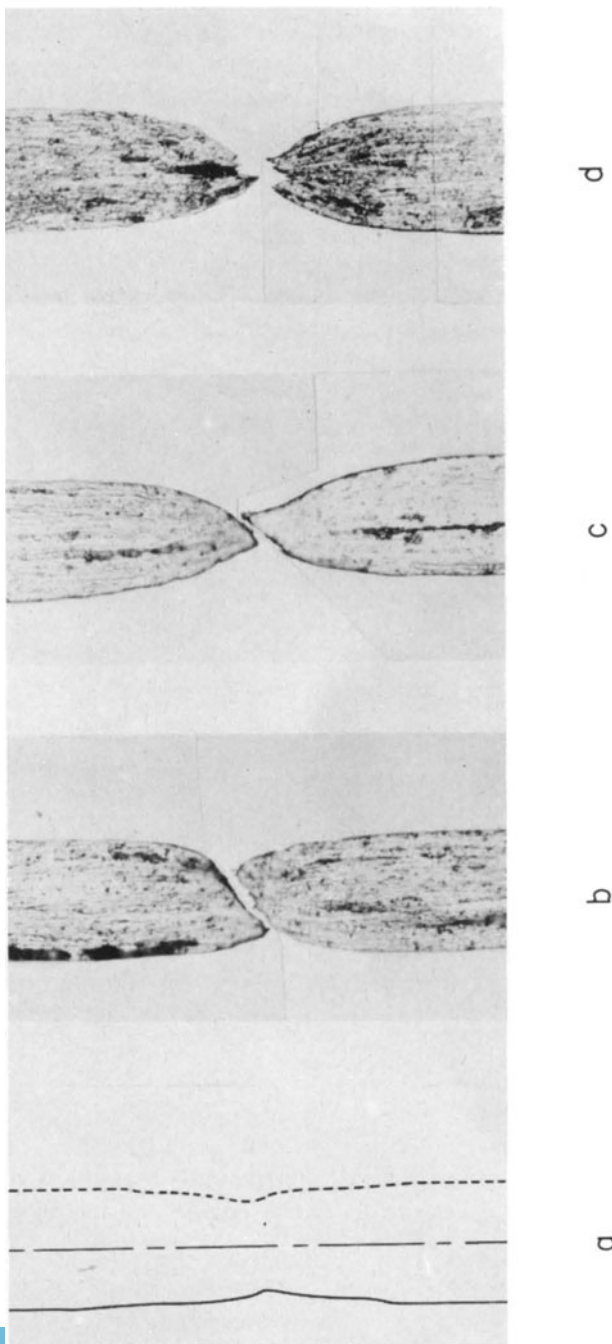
Cross sections through actual plastic zones in the steel foil: (a) close to the root of a notch just before crack extension (from interferometric pattern), (b) same section as (a) after penetration by a slow moving crack, (c) Section fractured by a fast-moving crack, and (d) Cross section of an unnotched tensile coupon.
